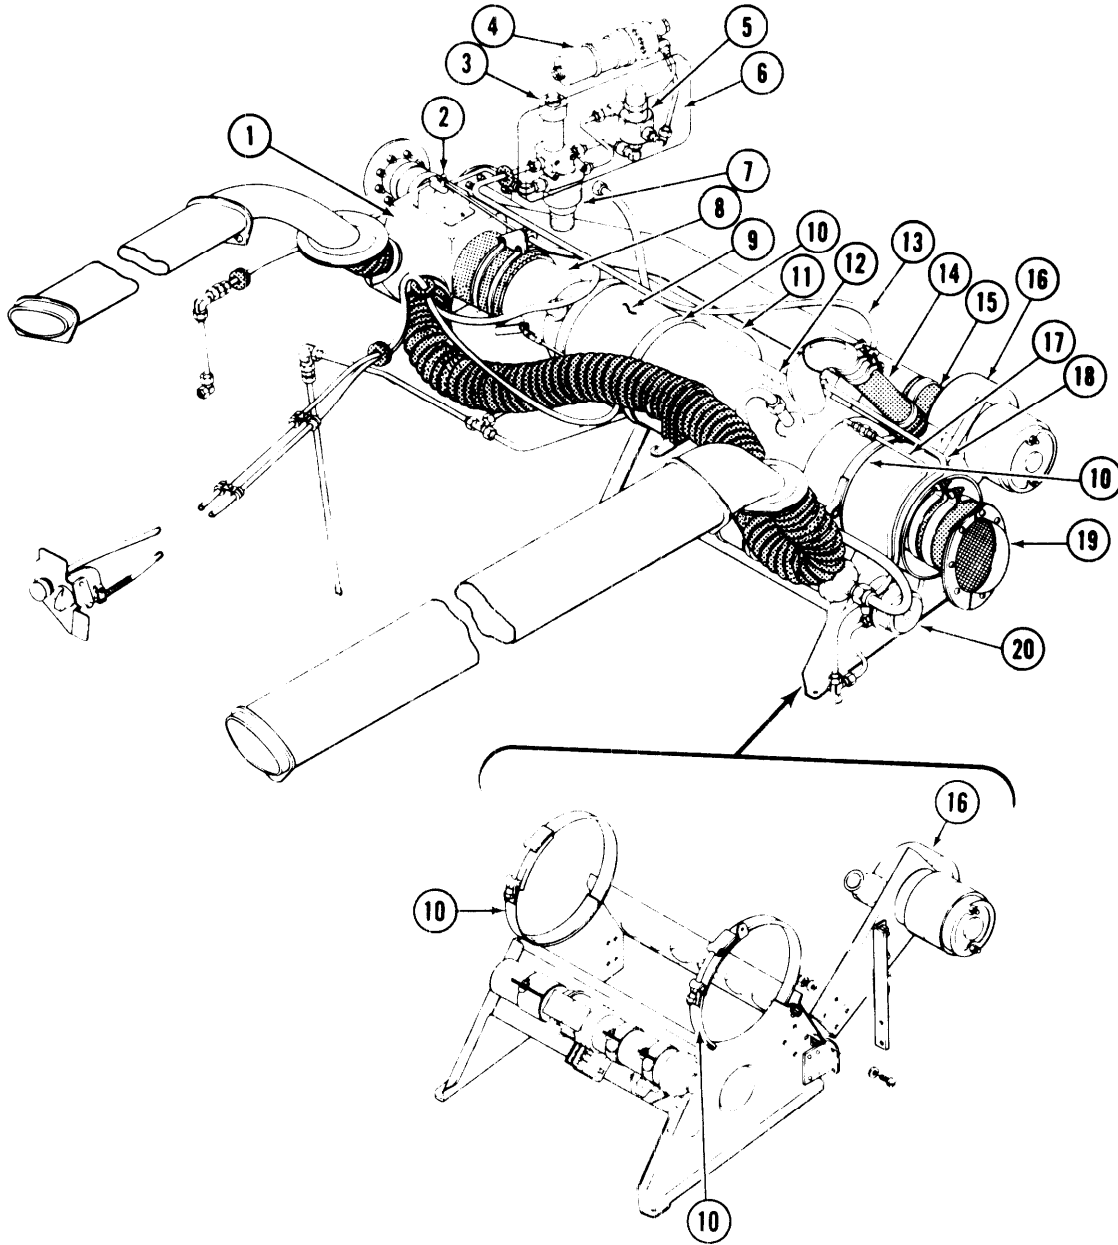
Bleed Air Valve Assembly — Bleed Air Heater (Sheet 1 of 2)
